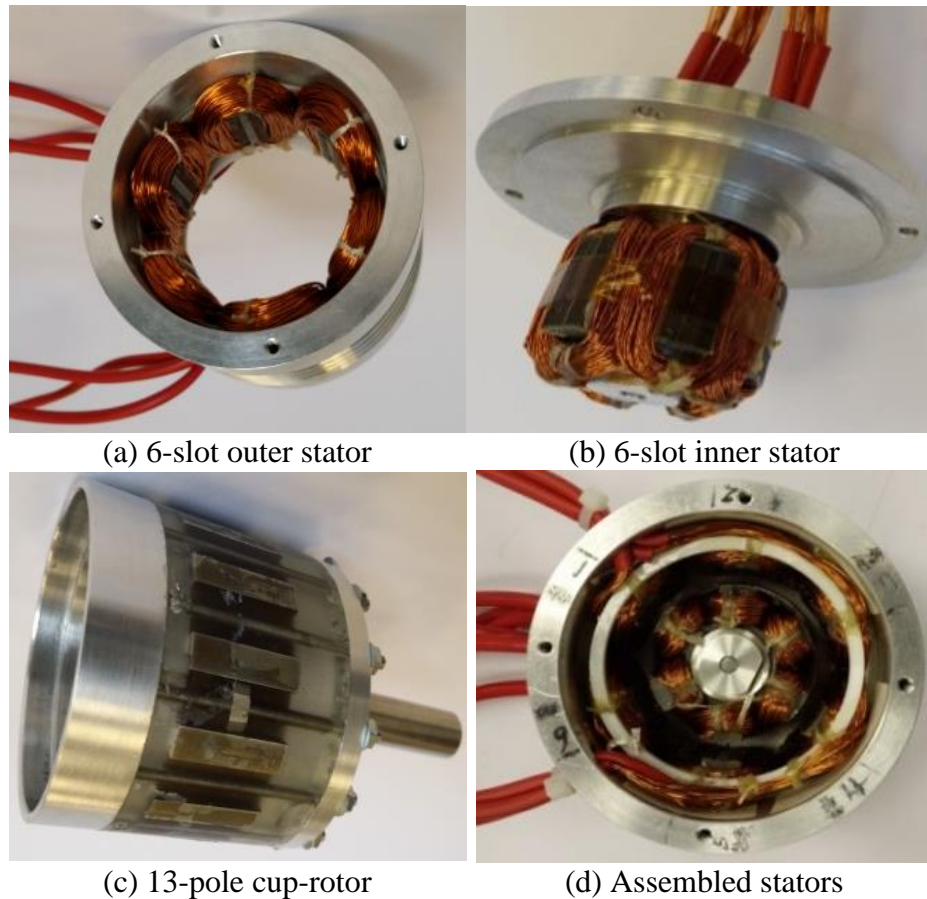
Manufactured prototype of 13-pole DS-SFPM machine.
